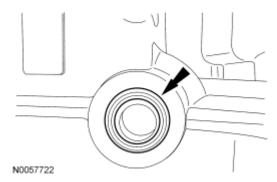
Identifying Manual Control Lever Shaft Seal Courtesy of FORD MOTOR CO.
